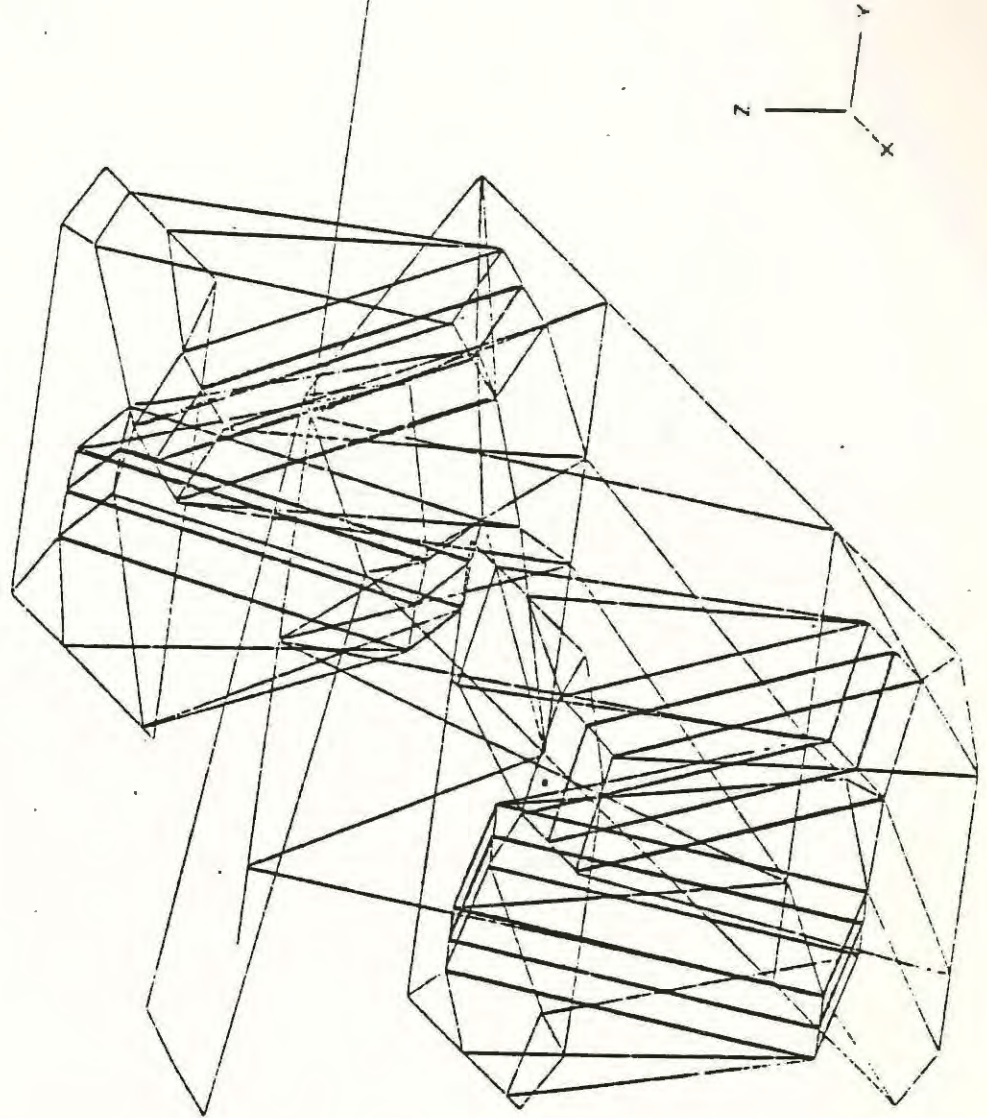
JOURNAL HOUSING, NON-STEERING SIDE - Element Group 12.
